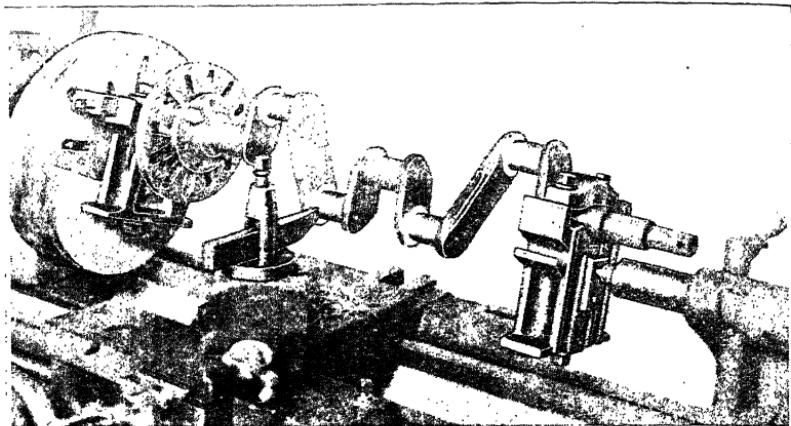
Truing Crankshaft Throw Bearings, Using Norton Throw Centers
